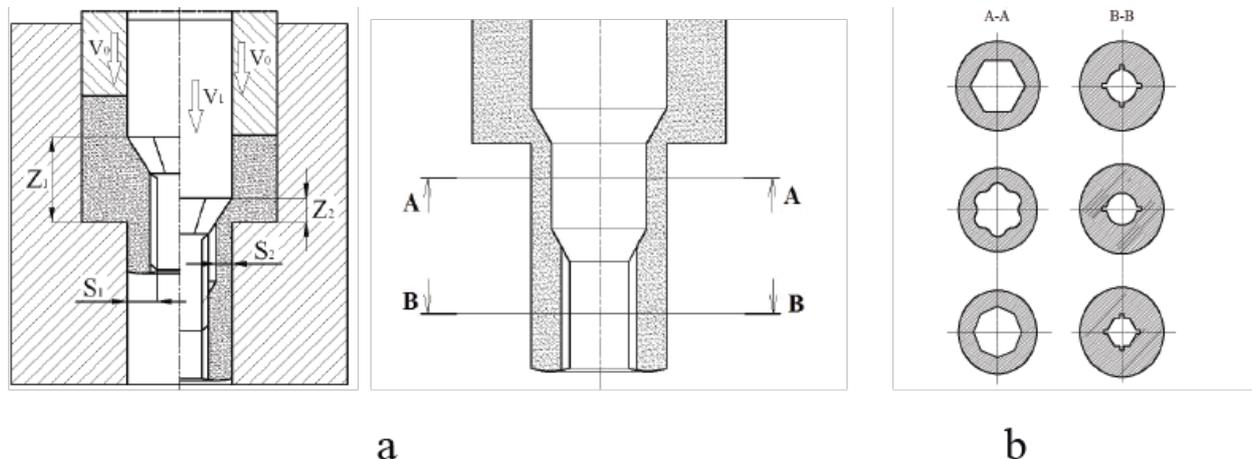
Transitions when extruding figurine-shaped parts on the moving mandrel (a) the scheme of extrusion on figurine-shaped mandrel (b) example of obtaining part
